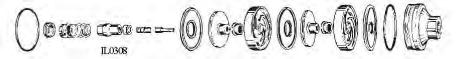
Cartridge Assembly Includes Discharge Bearing, Shaft & Coupling Assembly, Diffuser Plate, Impellers, Diffuser Bearings, Diffusers and O-rings
